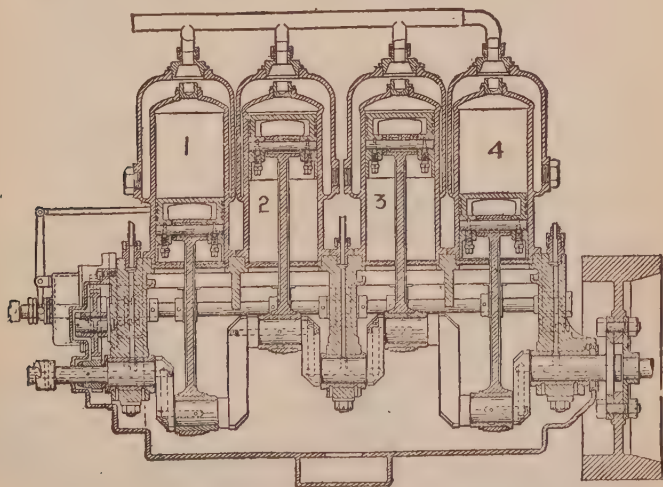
A typical four cylinder engine showing position of cranks and working parts, including secondary shafts.
